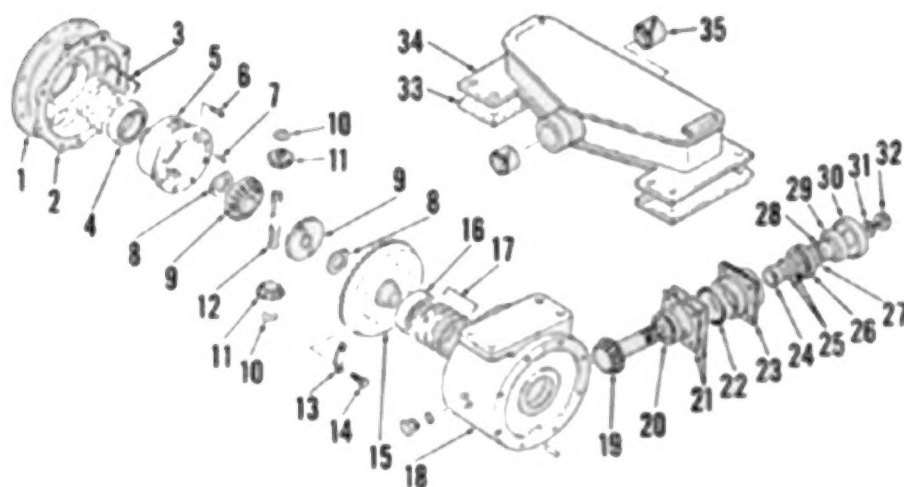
Exploded view of center (differential) section of front drive axle.
